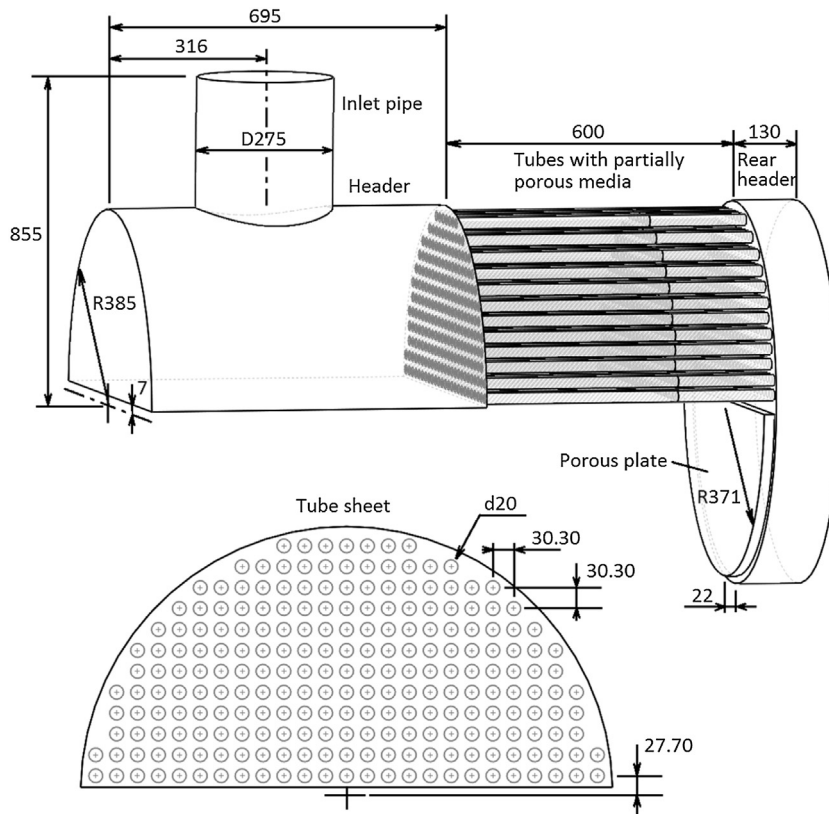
The main dimensions of the model for a shell and tube heat exchanger and the tube sheet indicating the arrangement of tubes (dimensions are in mm).
